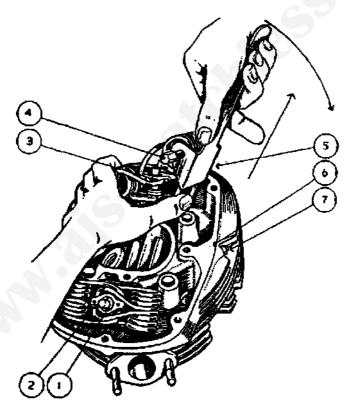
ALTERNATIVE TYPE OF TOOL TO THAT SHOWN IN FIG. 5 FOR VALVE-SPRING REMOVAL.
